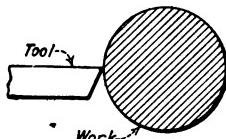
The screw-cutting tool should be mounted at the exact center of the work
